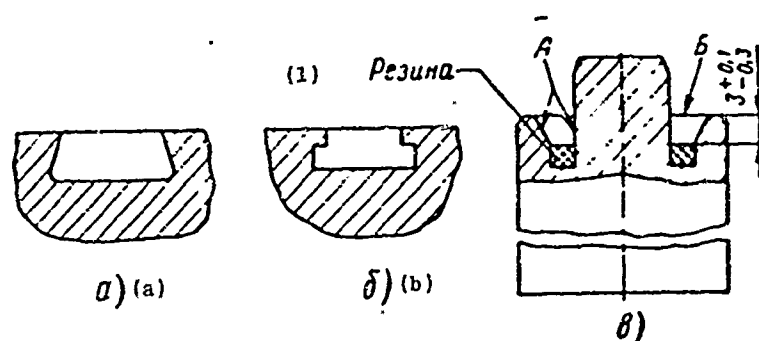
Shape of the groove of a rubber seal (in the finished part): a - with reliable adhesion of the rubber; b - with a cement which is unstable with respect to the propellant; c - view of a billet of a rubber-metal part after vulcanization.
